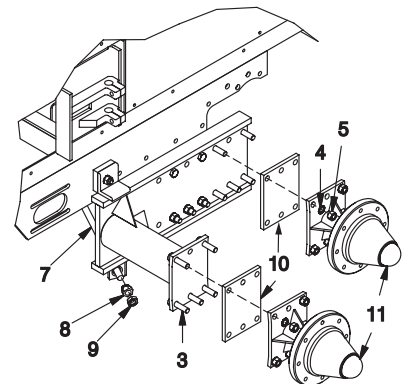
Mounting Spacer Plates, Hubs & Truss Rod
